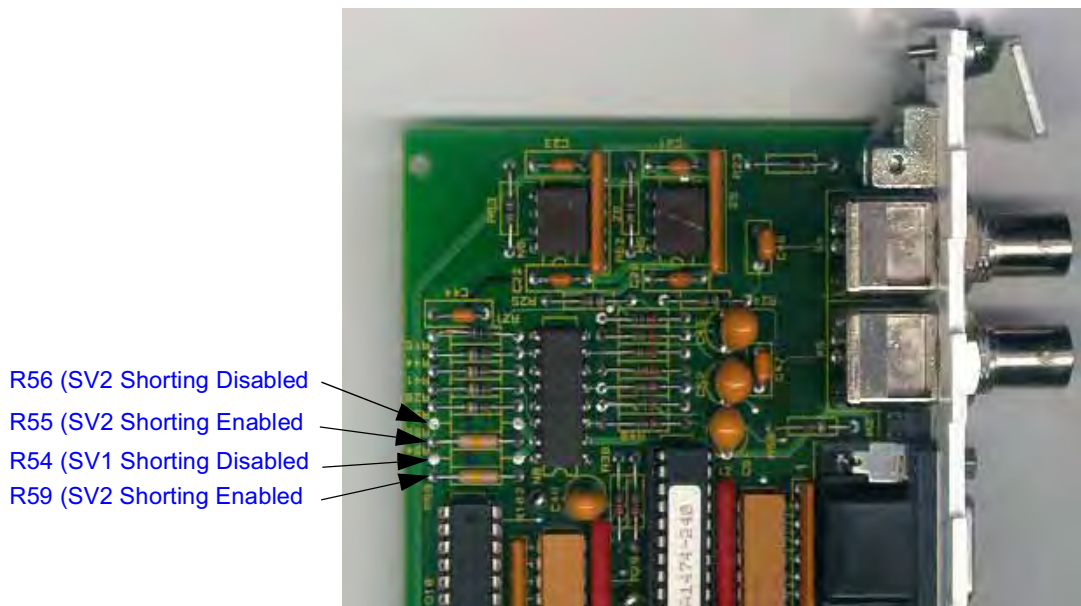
Servovalve shorting resistor locations (A1721-1025)
